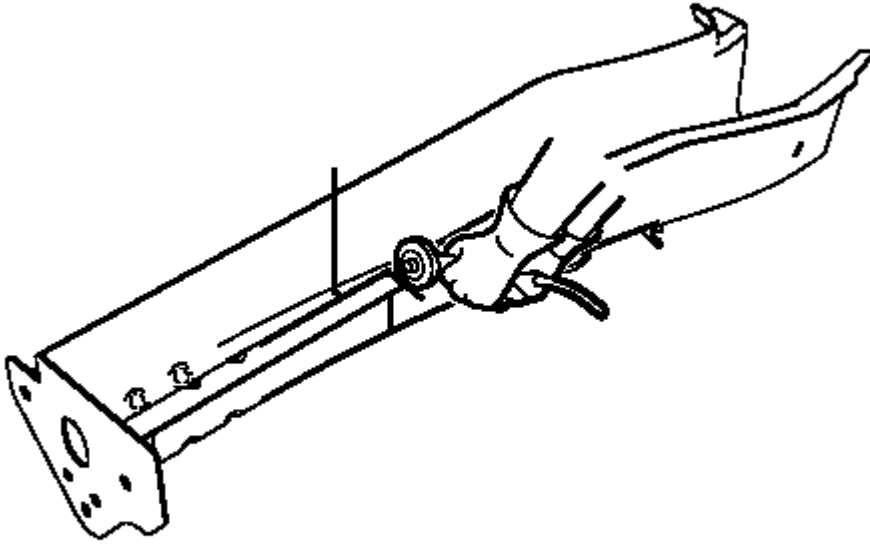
Cutting Rear Side Rail In Corresponding Locations
